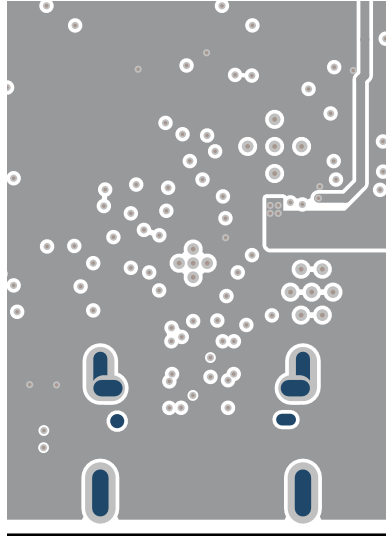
TPS26750 PCB Layout - Signal Layer 4
